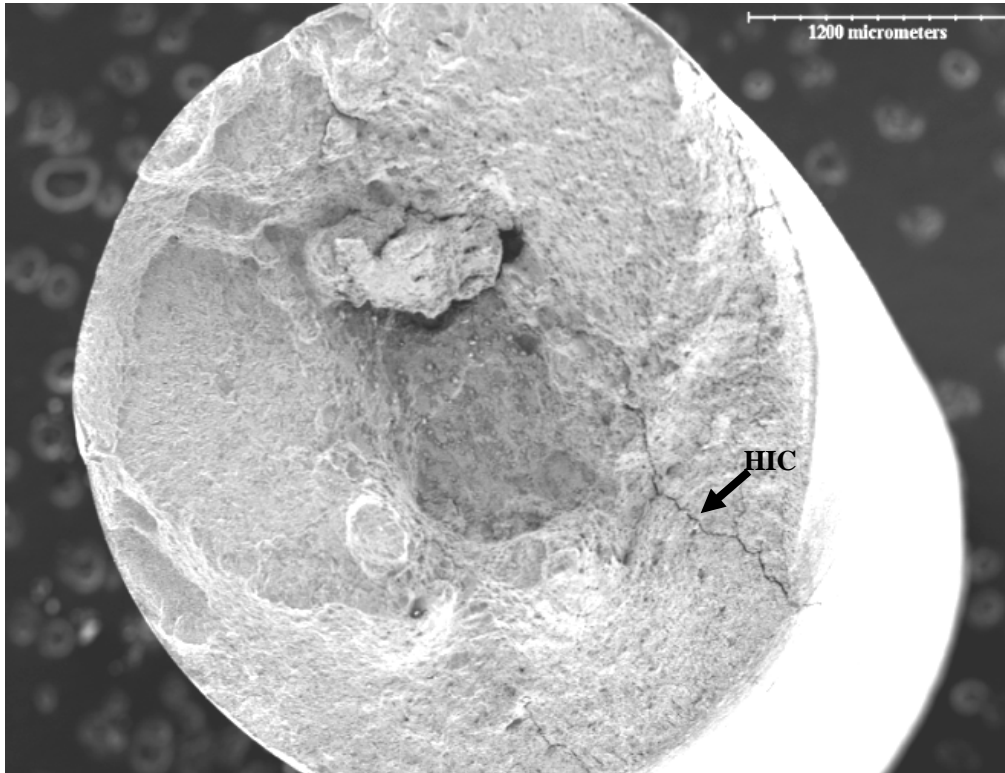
ERW L80-CrMo fracture surface.
